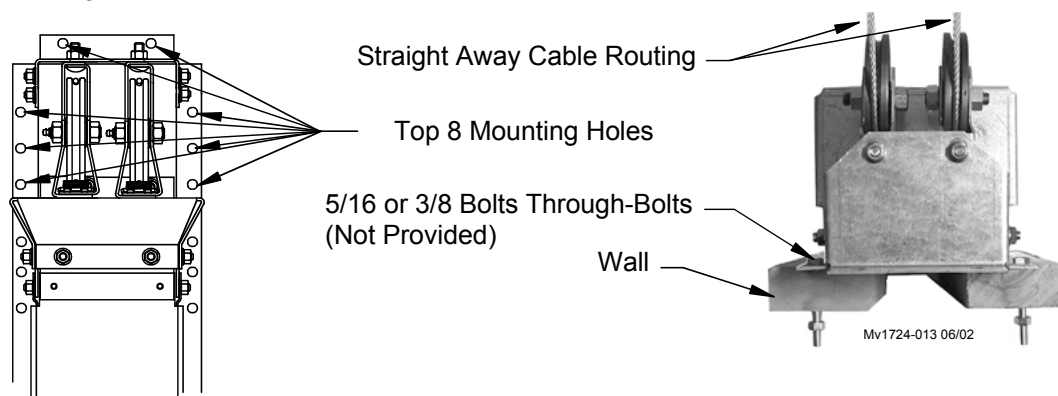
Swivel Top Linear-Lift™ Installation (vertical wall view of Cable Version Shown)
